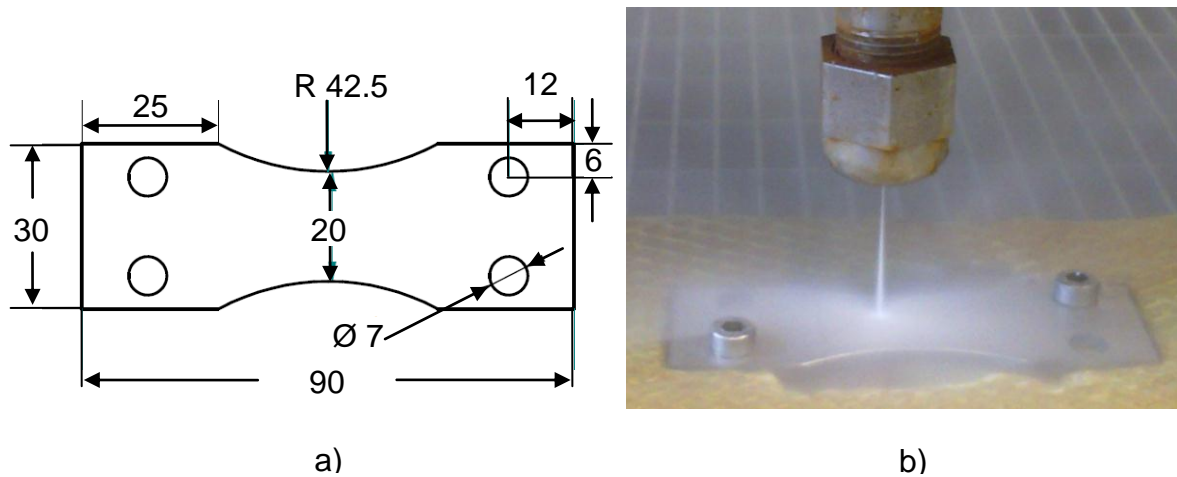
a) Schematic drawing of the fatigue test specimen (all dimensions are in millimetres), b) waterjet peening of fatigue specimen
